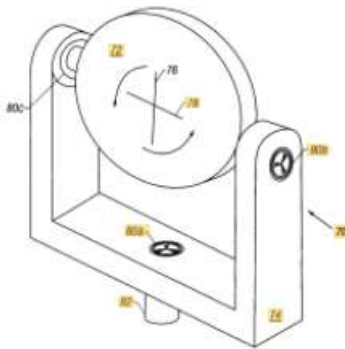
perspective view of a dual axis gimbal containing several rotary flexures like that shown in Fig. 22 [15].
